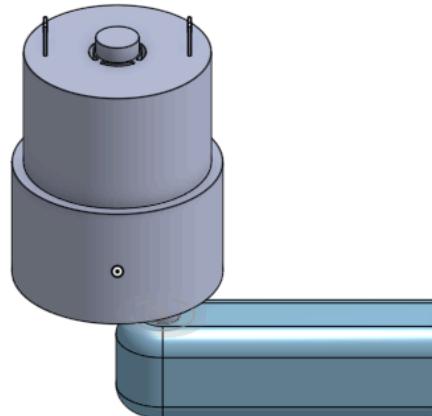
Scraper Bit Holder Attached To GB37-520 Motor (Back View)
